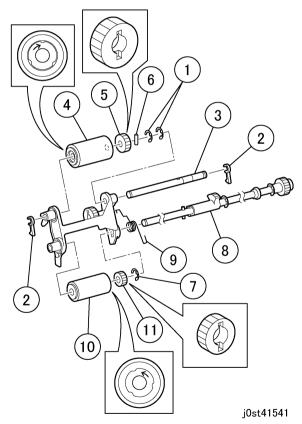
Removing the Nudger Roll and Feed Roll (j0st41541)
